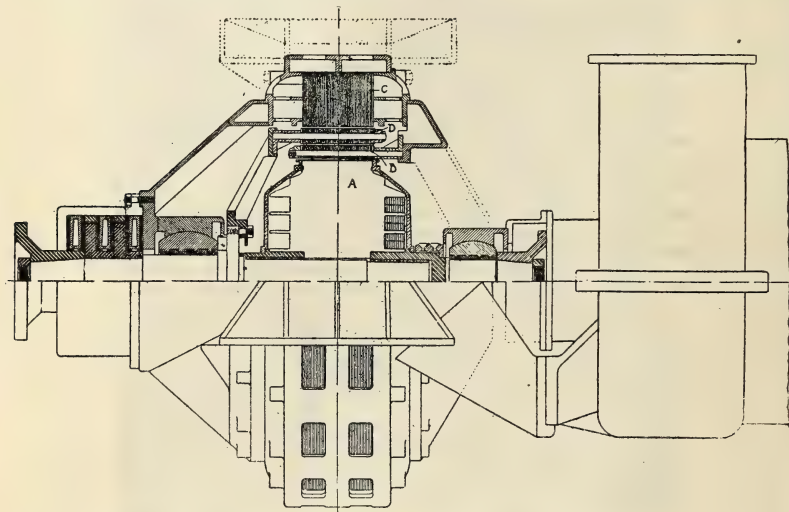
Design of a 1500 H. P. Gear Reducing from 3600 R. P. M. to 109.
